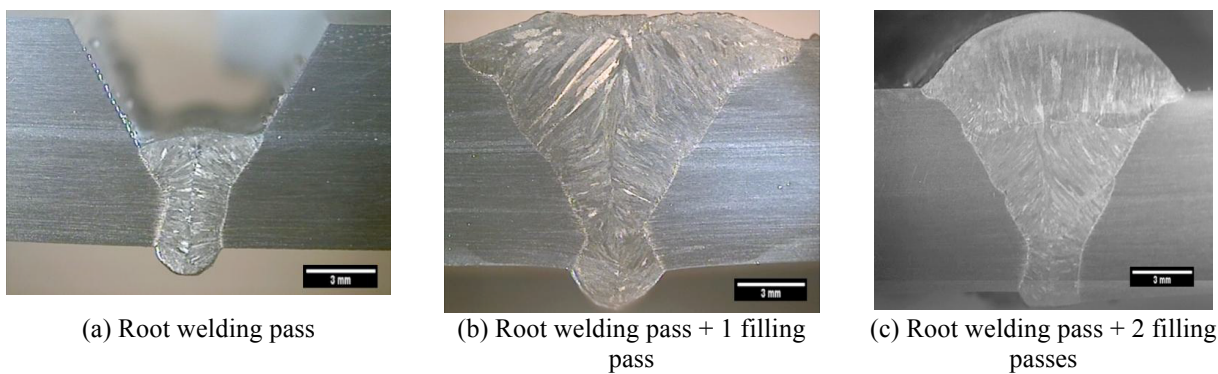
The cross-sectional macrographs of the welded samples
